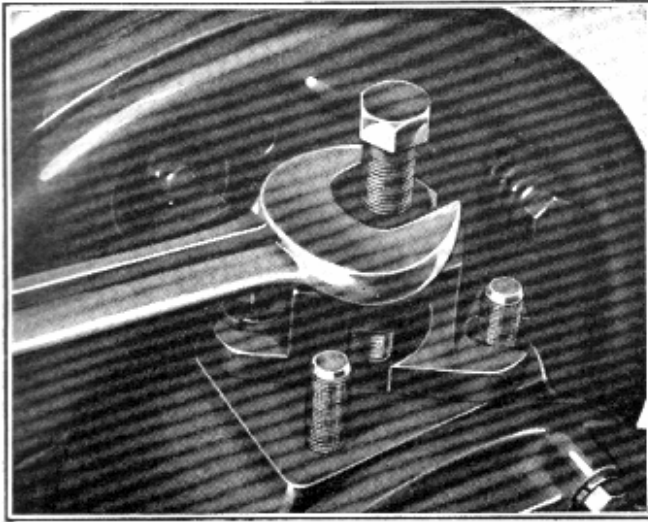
Pivot Pin Removal Tool No. XA-3363-A
